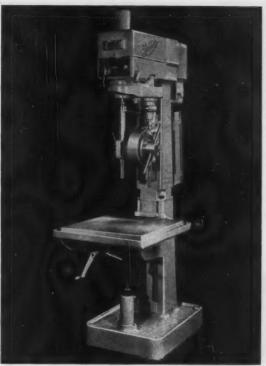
New model "RPMster" drilling machine to be demonstrated by Buffalo Forge Co.
